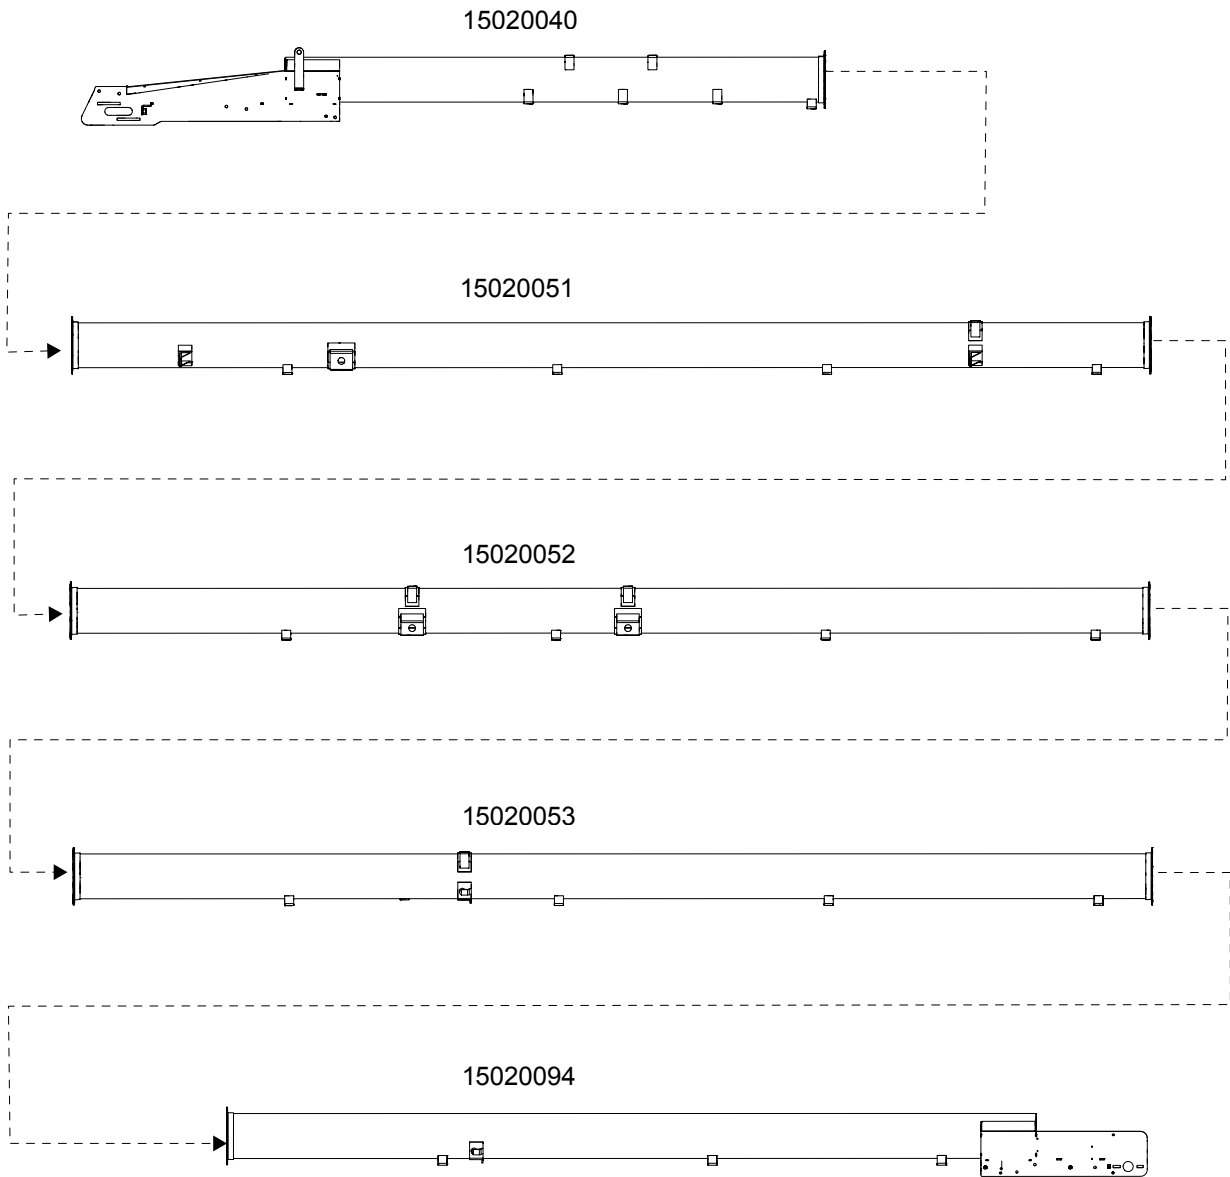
Conveyor Tube Layout for 1590 Model (Hutchinson)
